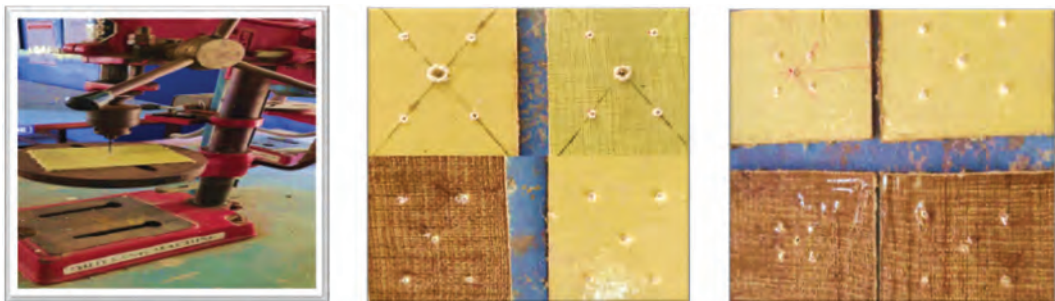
Drilling machine, specimen with 12-mm and 4-mm radius holes.
